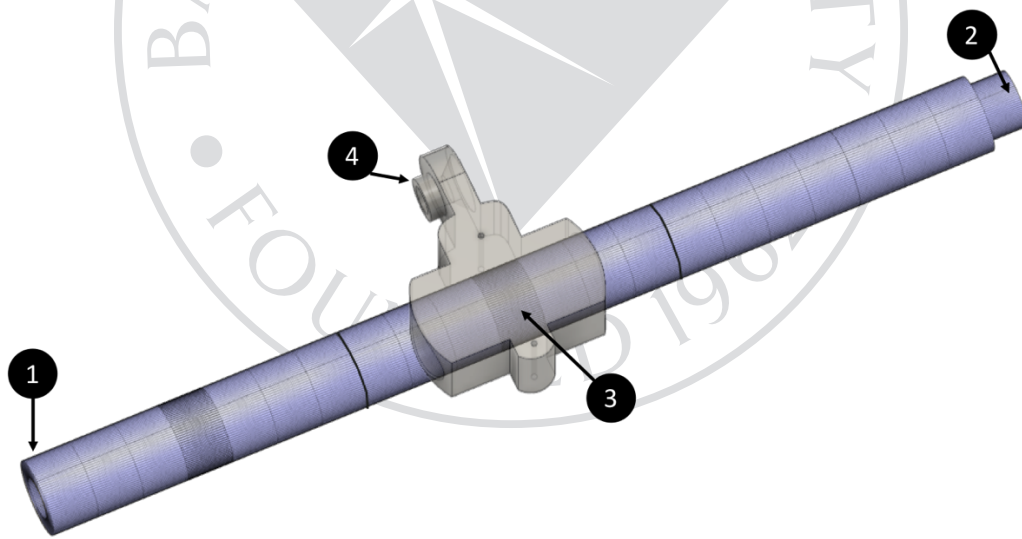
3D printed tube mounting representation, 1) Telescope camera, 2) Lens tube, 3) Holder structure, 4) Finder-scope holder.
